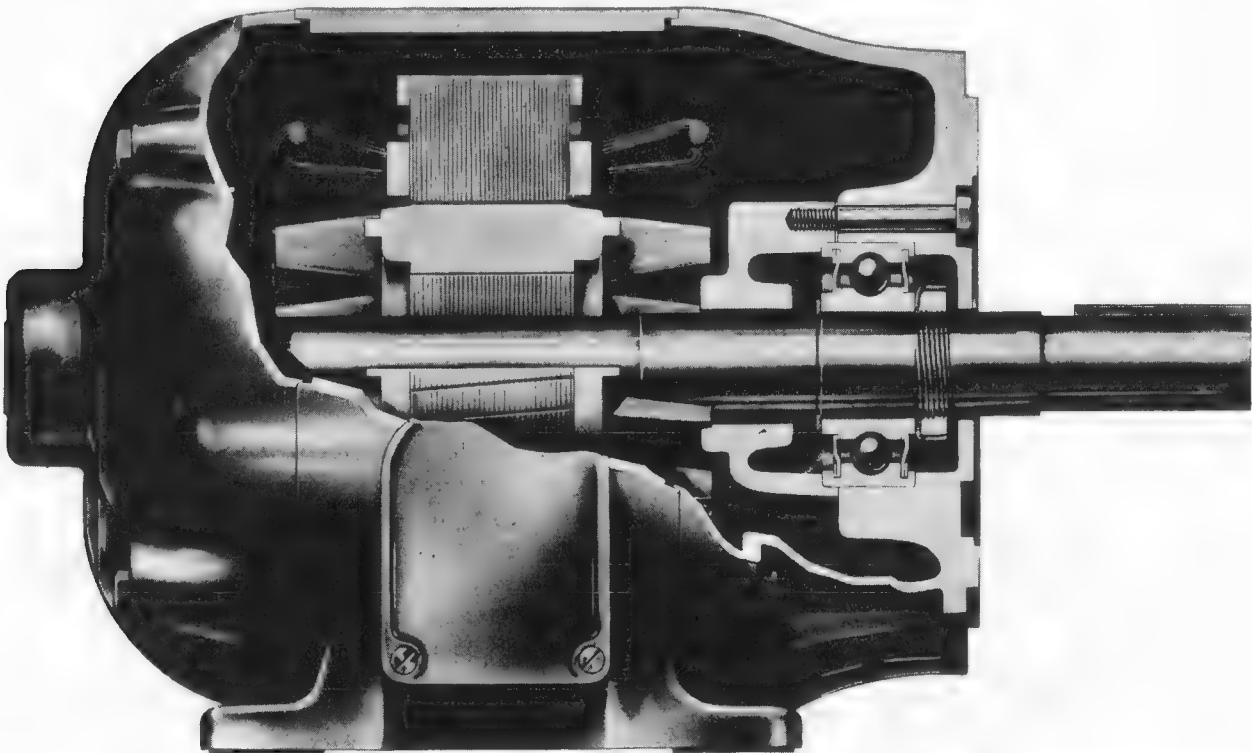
Squirrel-cage rotor with brazed bars and rings.
